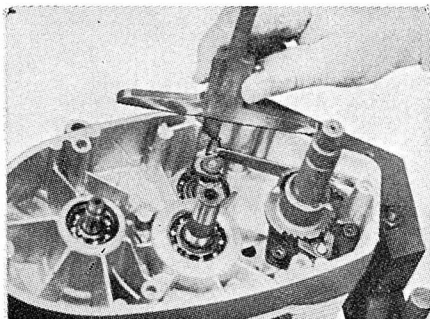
Refer to text for measuring and setting the gear shift assembly on 50 and 80cc models.
